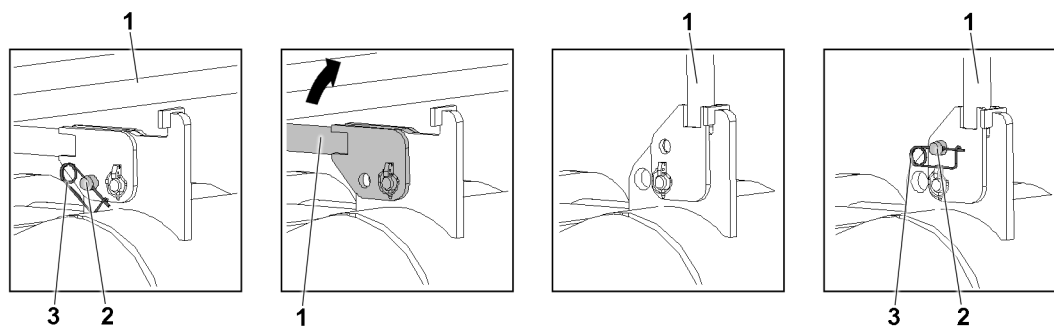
Fall protection equipment on the boom pivot sections and on the lattice sections — assembling the railing in the operating position
